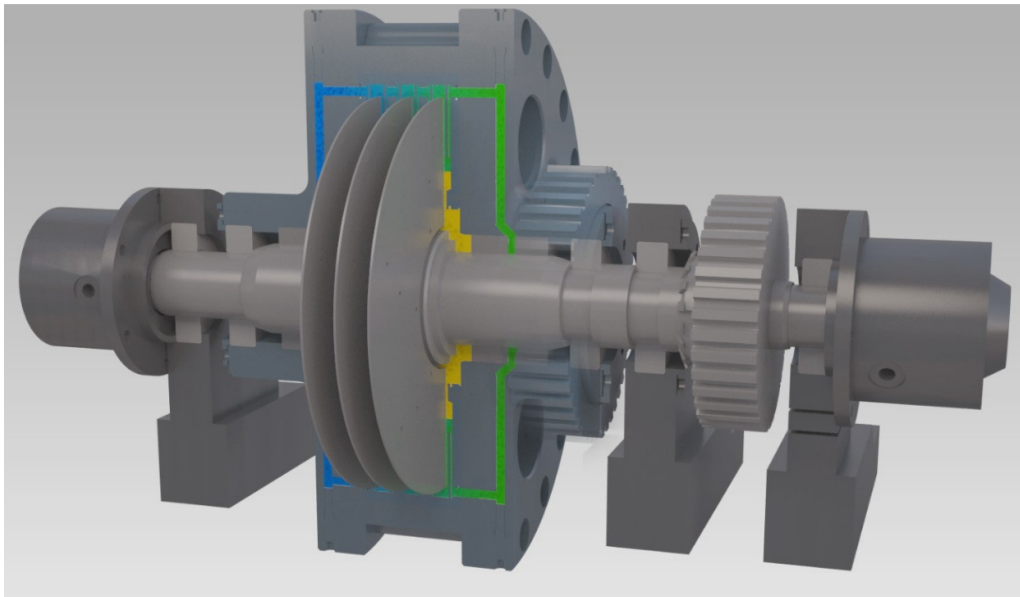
Side view of the three-stage prototype. Three impellers-in-series are placed on a single rotatable shaft, inside the enclosure. Weirs are present between the impellers and separate the consecutive stages.
